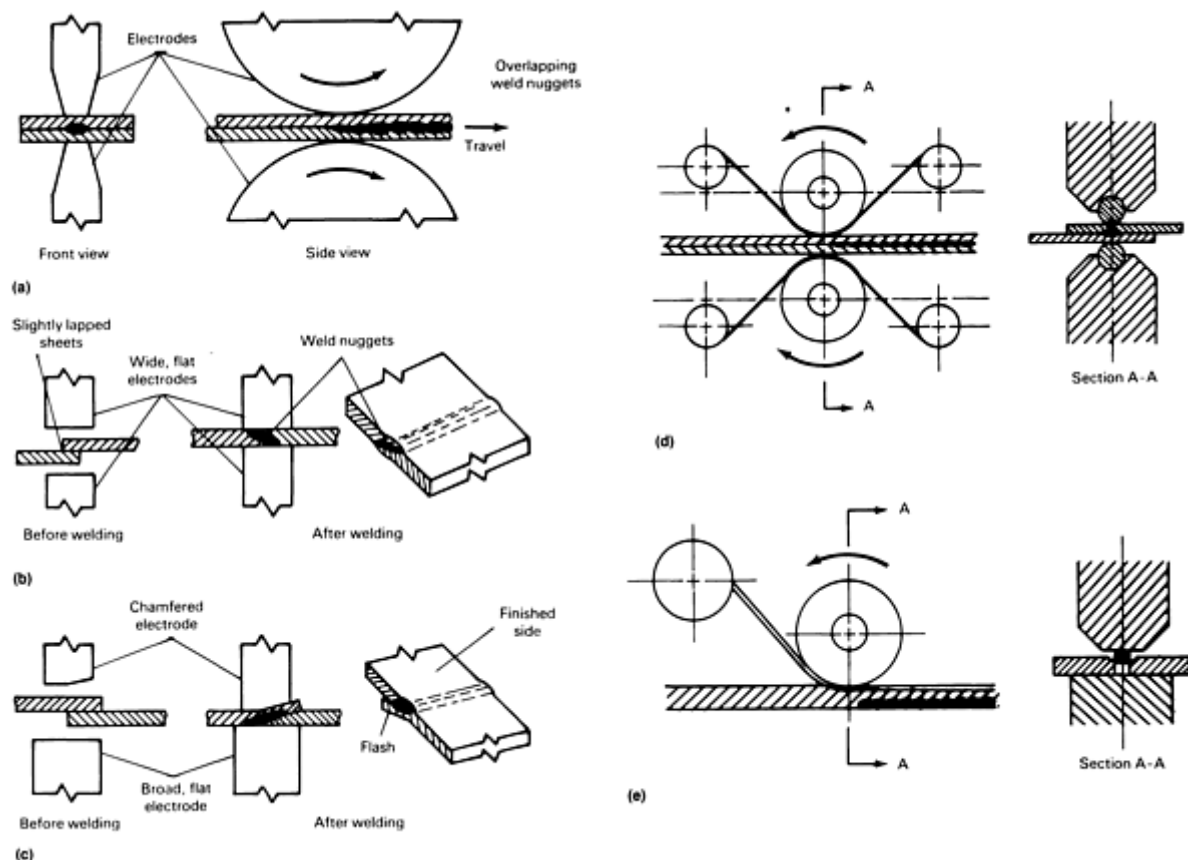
PROCESS VARIATIONS OF SEAM WELDING. (A) LAP SEAM WELDING. (B) MASH SEAM WELDING. (C) METAL FINISH SEAM WELDING. (D) ELECTRODE WIRE SEAM WELDING. (E) FOIL BUTT SEAM WELDING
